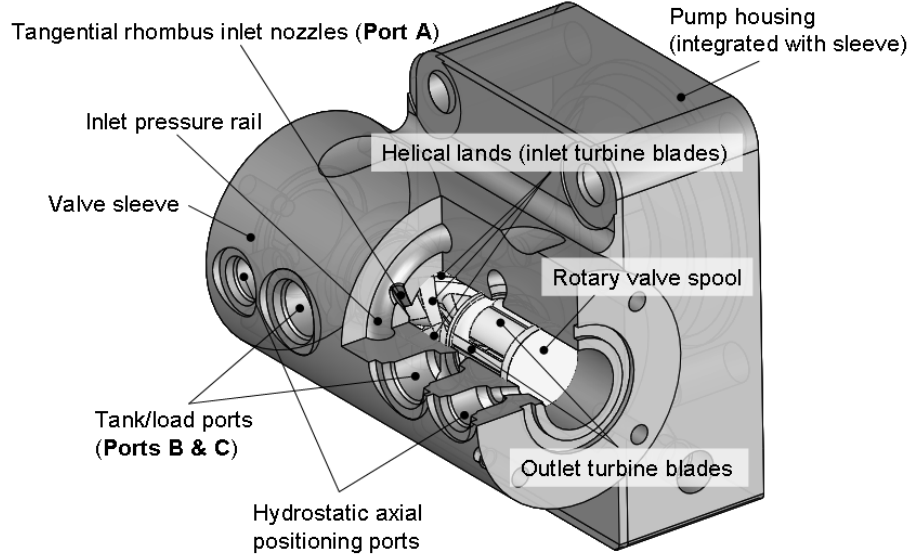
3-way rotary valve spool, sleeve, and pump housing assembly.
